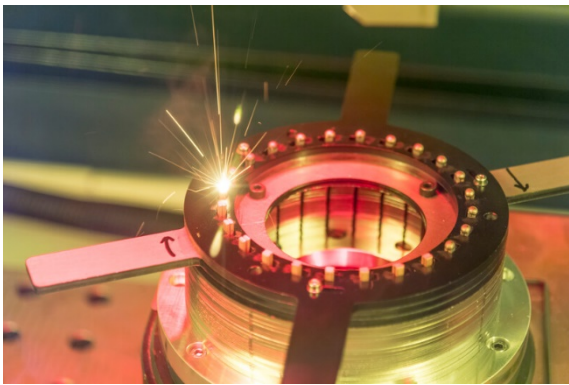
Standard laser welding of hairpins with spatters from the process on a demonstrator of a stator [TRUMPF].
